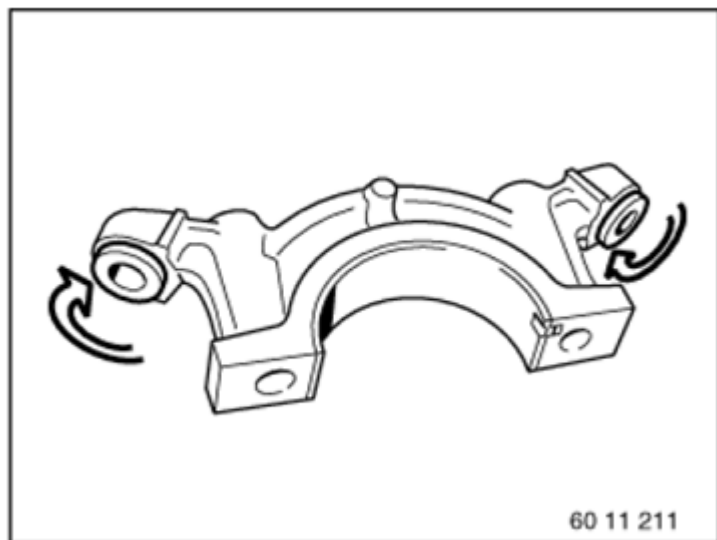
Turning Back Thread Support Bushing Into Main Bearing Cap
